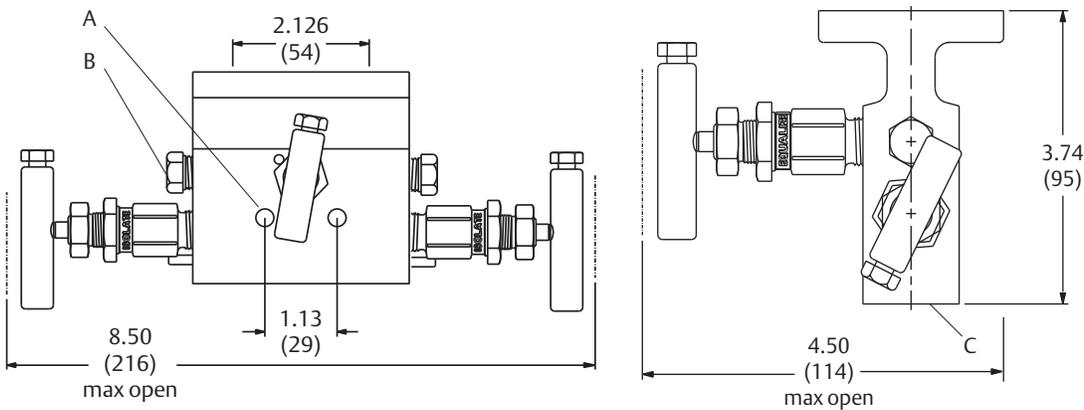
Rosemount 304RT 2-Valve Flange × Flange Conventional Manifold⁽¹⁾
